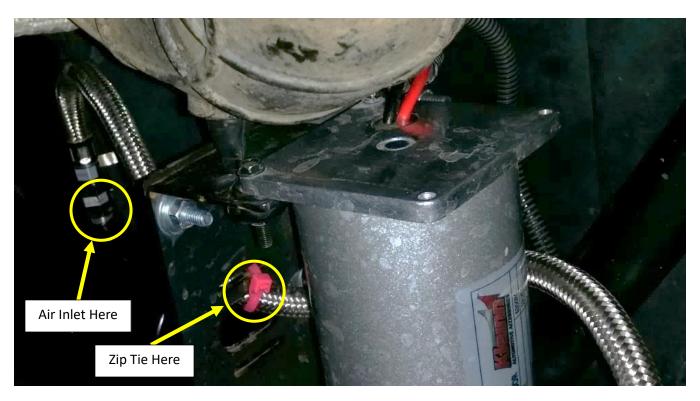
Air Compressor Final Install with Leader Hose Connection to Air Tank
